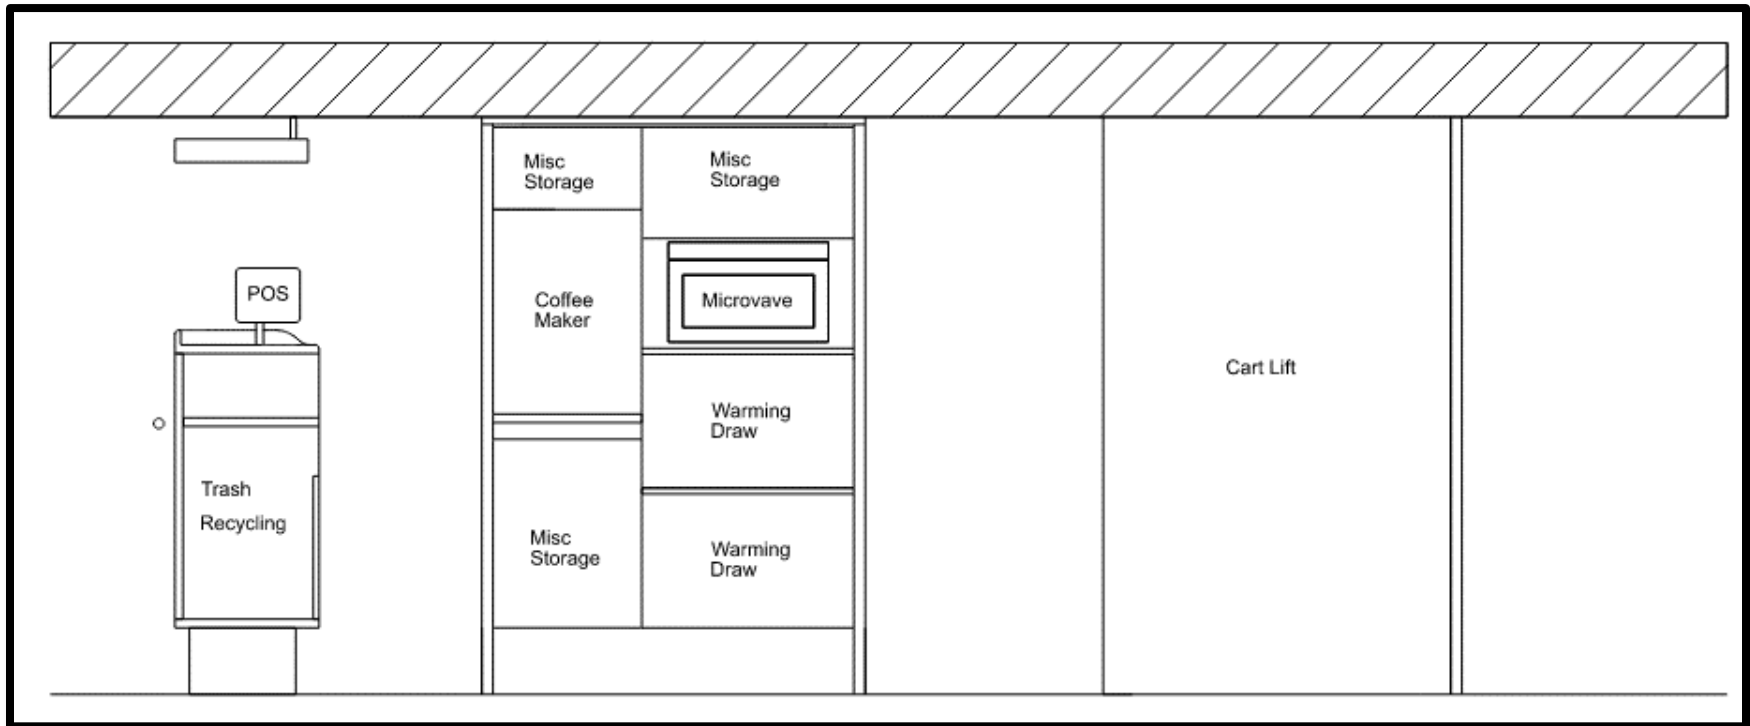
Servery Layout- Elevation Passenger Aisle
